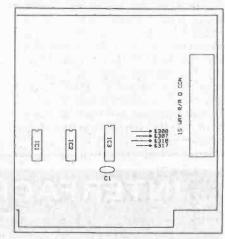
Component layout of the "working area" of the PC prototyping card, the board measures 204mm x 100mm.
